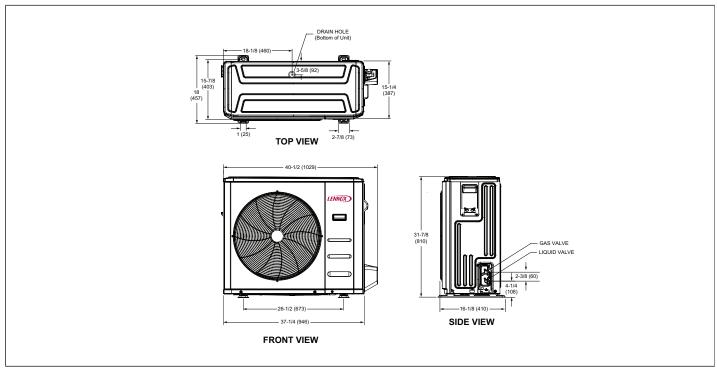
MPC036S4S Outdoor Unit Dimensions - Inches (mm)
